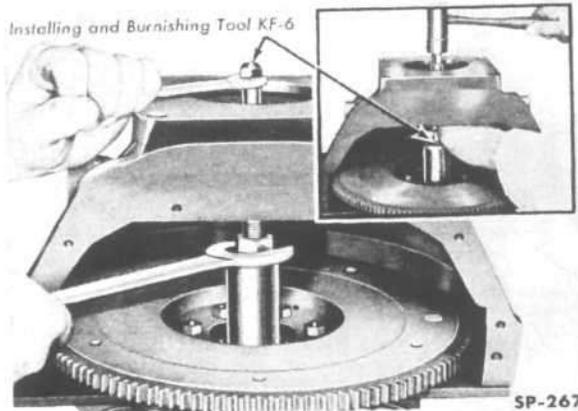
INSTALLING AND BURNISHING CRANKSHAFT PILOT BUSHING
